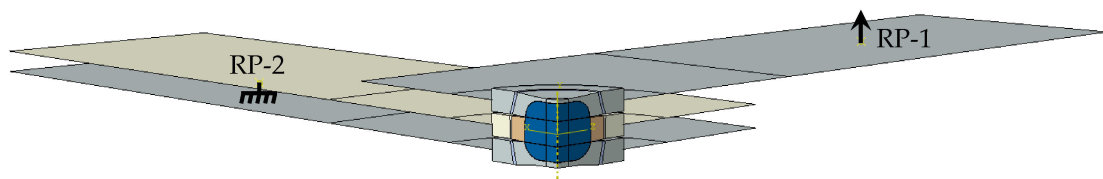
Minimal symmetry of Usibor2000/DP780 triple-sheet heterogeneous spot weld mechanical tests with the loading conditions: spot weld quarter in cross section.
